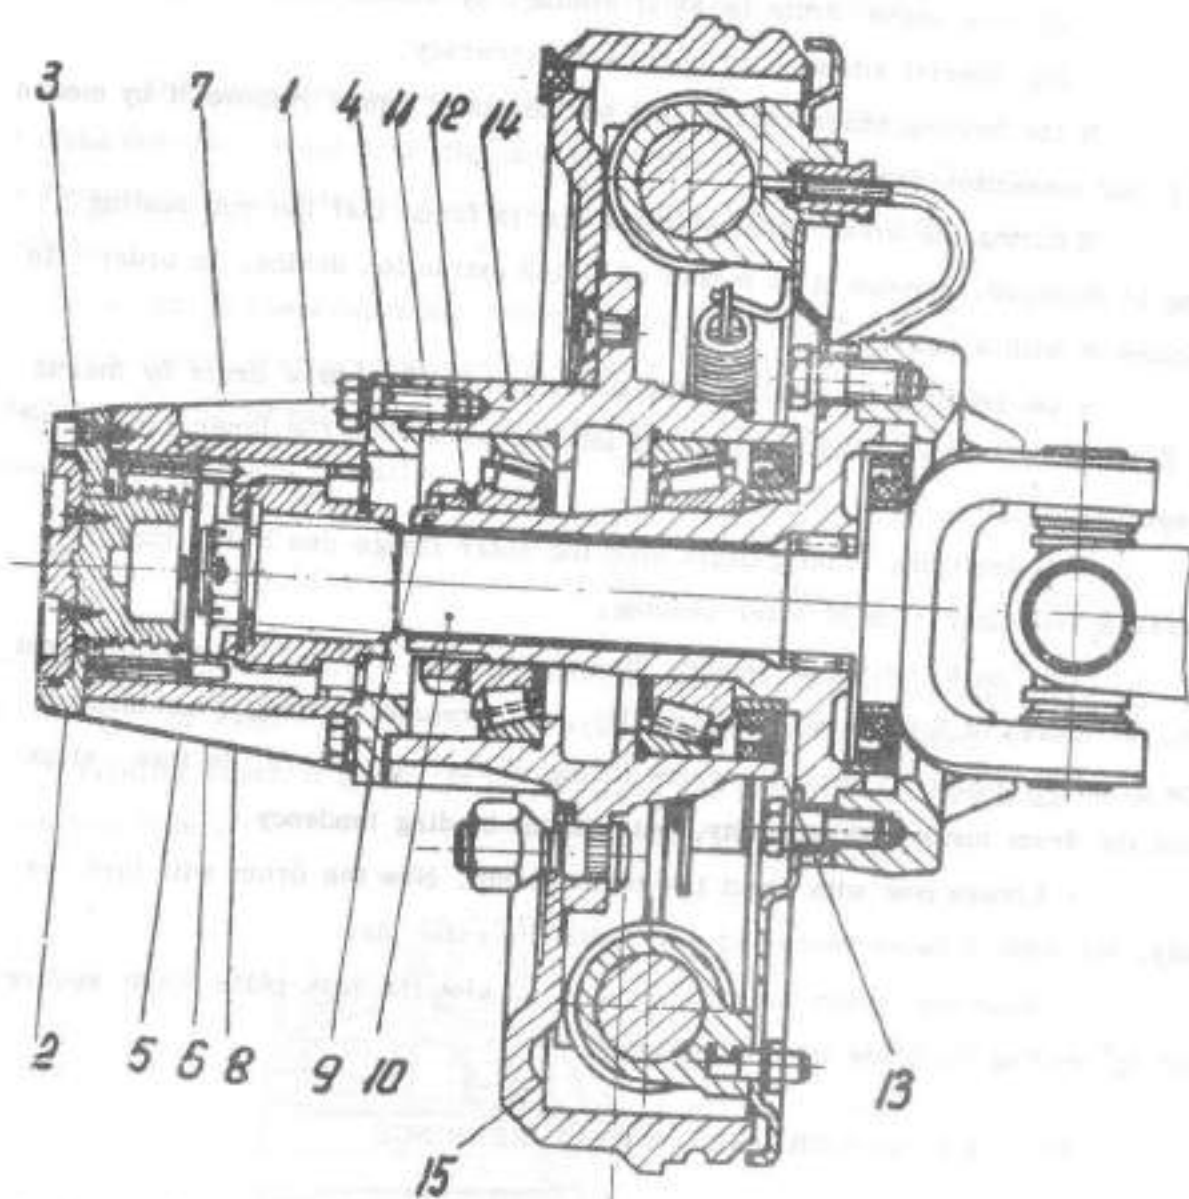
FRONT WHEEL BRAKE DRUM KING PIN ASSY
